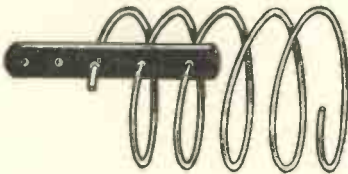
THREADING SPACERS ON S.W. COIL.
